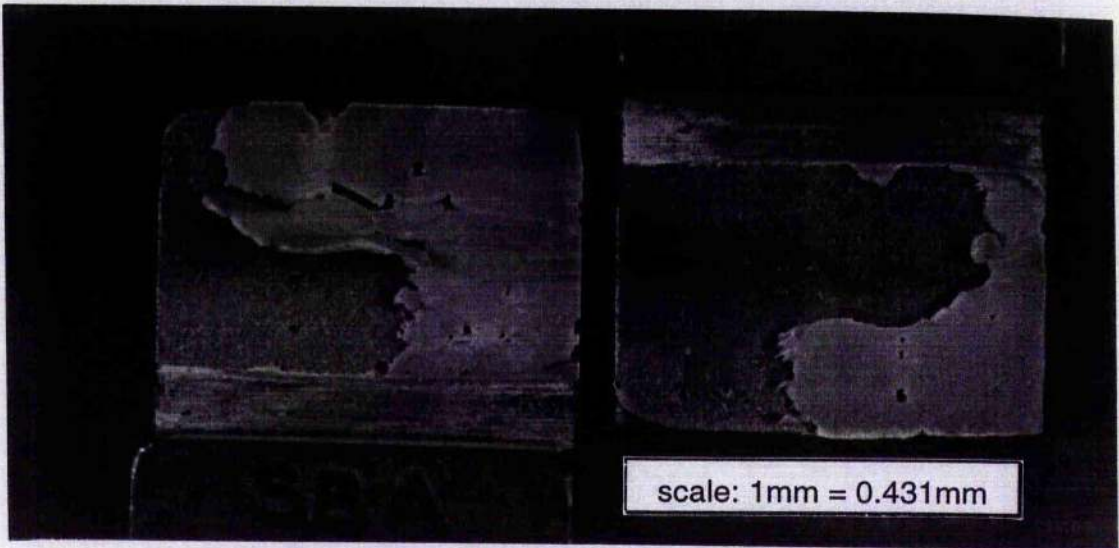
Failure surface showing good adhesion of a shot blast Araldite 2007 bonded steel lap shear joint
